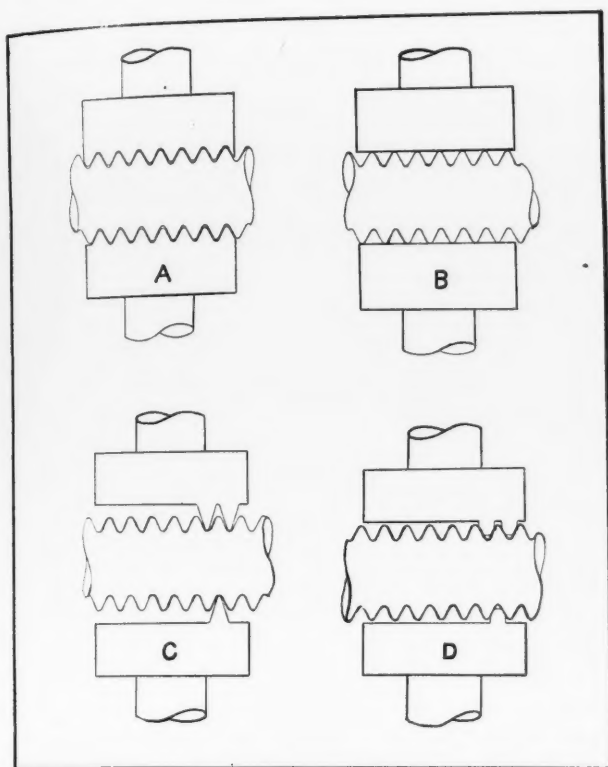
Gages for Rapidly Inspecting the Accuracy of Threads
